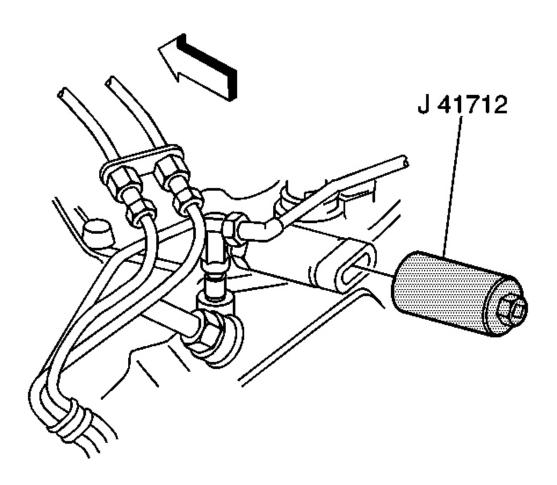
J 41712 Courtesy of GENERAL MOTORS CORP.
